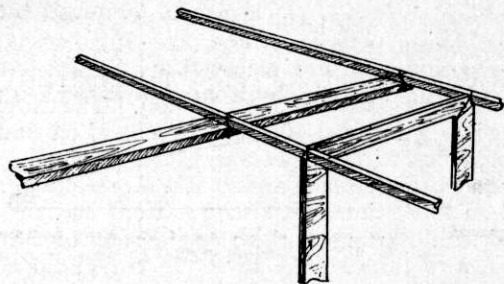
Another View of Float Construction showing Bulkhead in position and Method of attaching Inter-float Struts.
